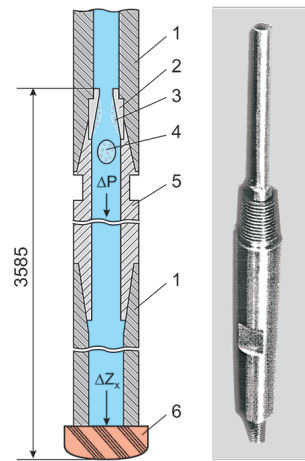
Layout of the drilling rig structure and photo of the hydraulic vibrator:
